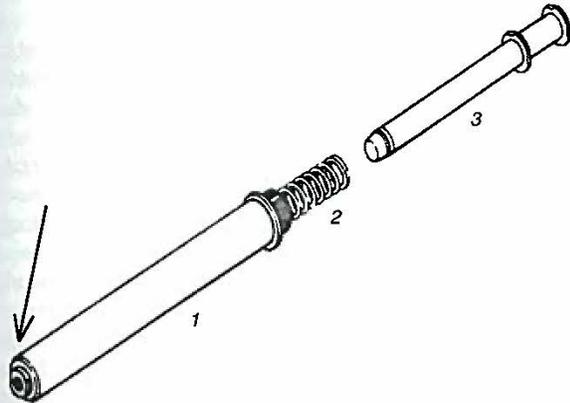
Solid butt stock receiver extension: 1) receiver extension tube, 2) action spring and 3) buffer assembly.
